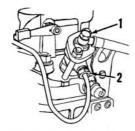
Illustration showing location of fuel return line banjo bolt (1) and injection line fitting (2). See text for fuel system bleeding procedure.
